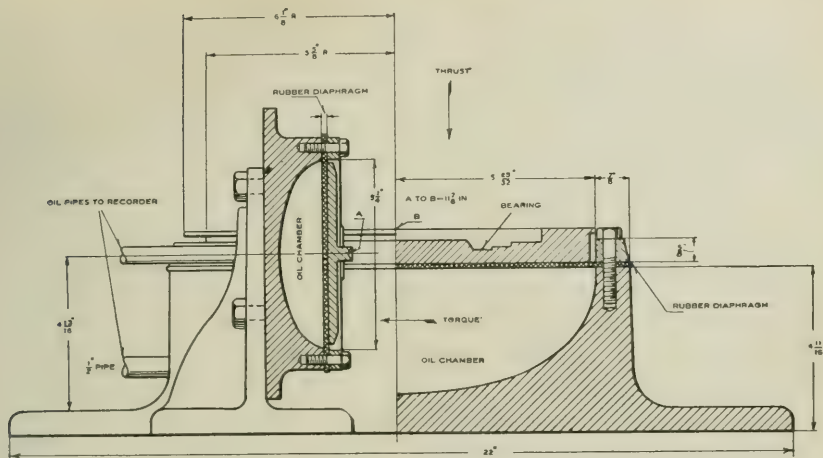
SECTIONAL ELEVATION OF DRILL DYNAMOMETERS
